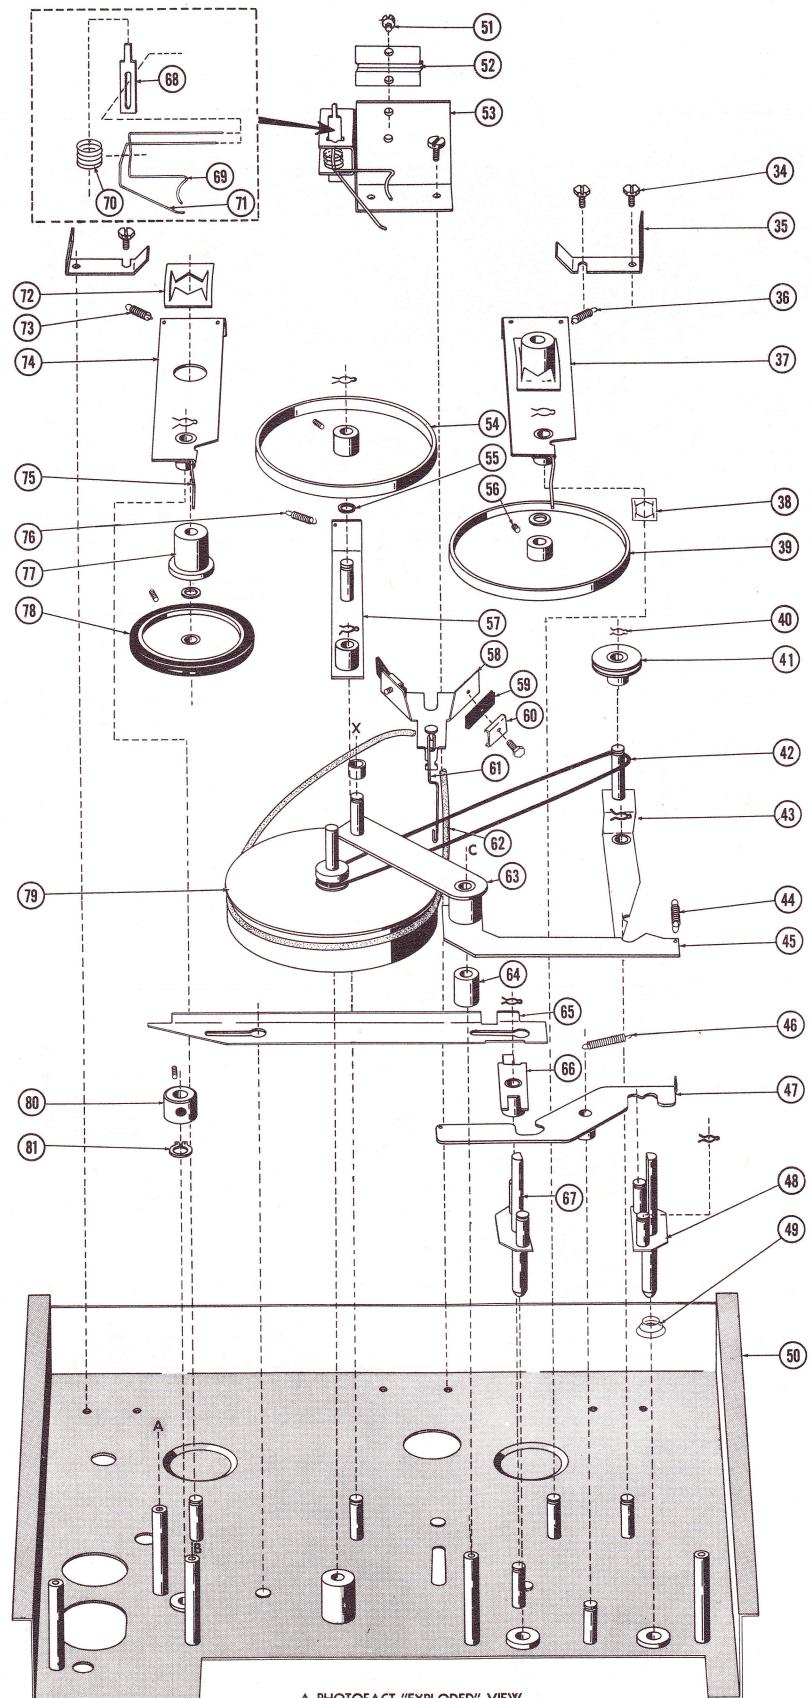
B EXPLODED VIEW OF PARTS ABOVE MOTOR BOARD
